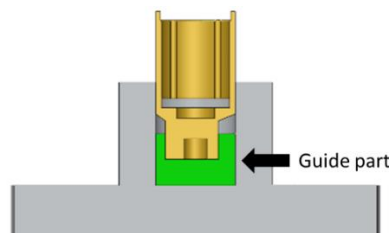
Cross section of a pallet with guide part. Guide part is shown in green.
